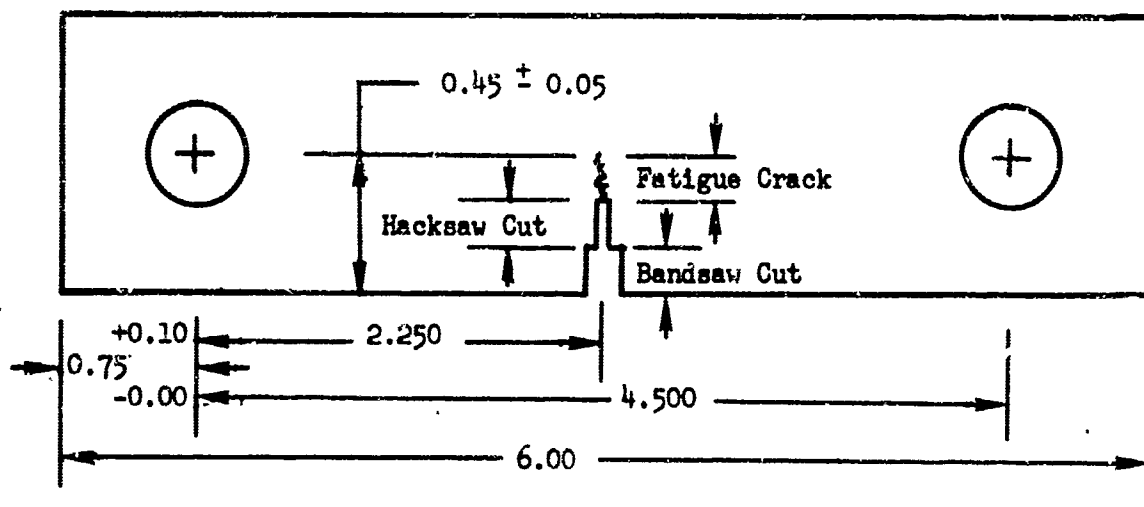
Edge Precracked Fracture Toughness Specimen Showing Crack Detail (Dimensions in Inches)
